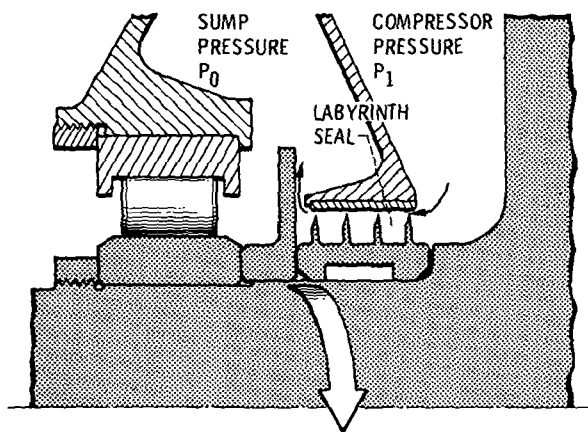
Single labyrinth seal - early engine or low pressure designs.
